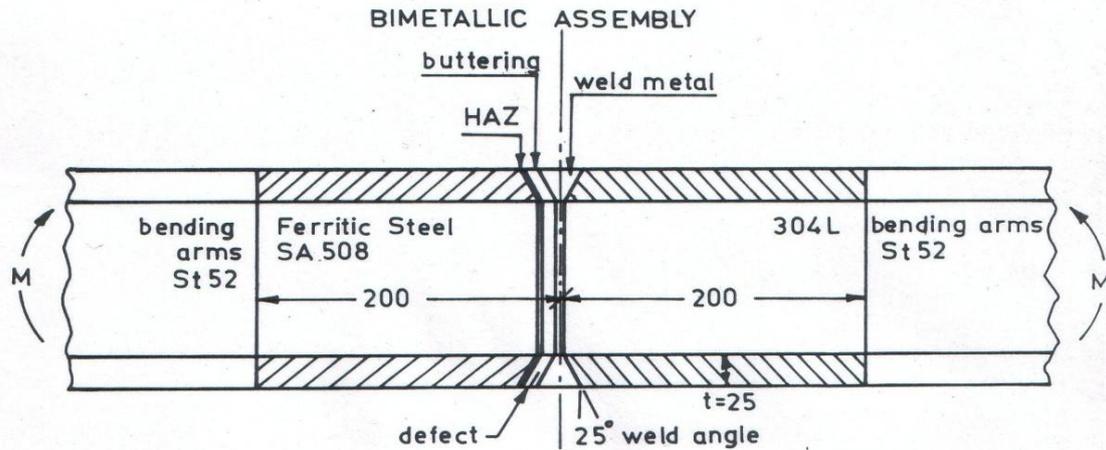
Ferritic- austenitic bimetallic weld configuration with a buttering layer and different zones [4].
